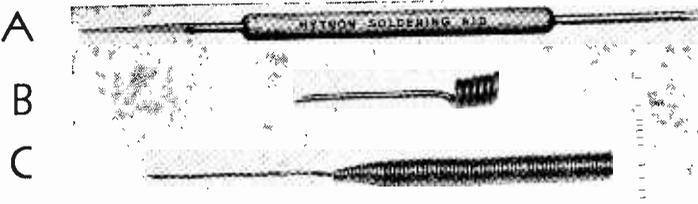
(a) The Hytron Soldering Aid ; (b) Home-made Soldering Iron Tip Extension; and (c) Home-made Soldering Pencil.
